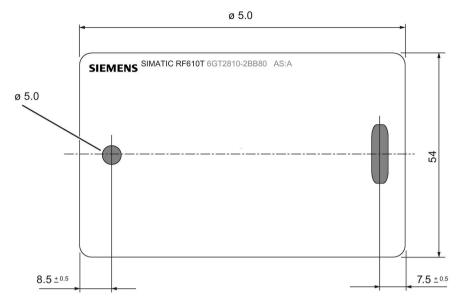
Dimensional drawing of SIMATIC RF610T
